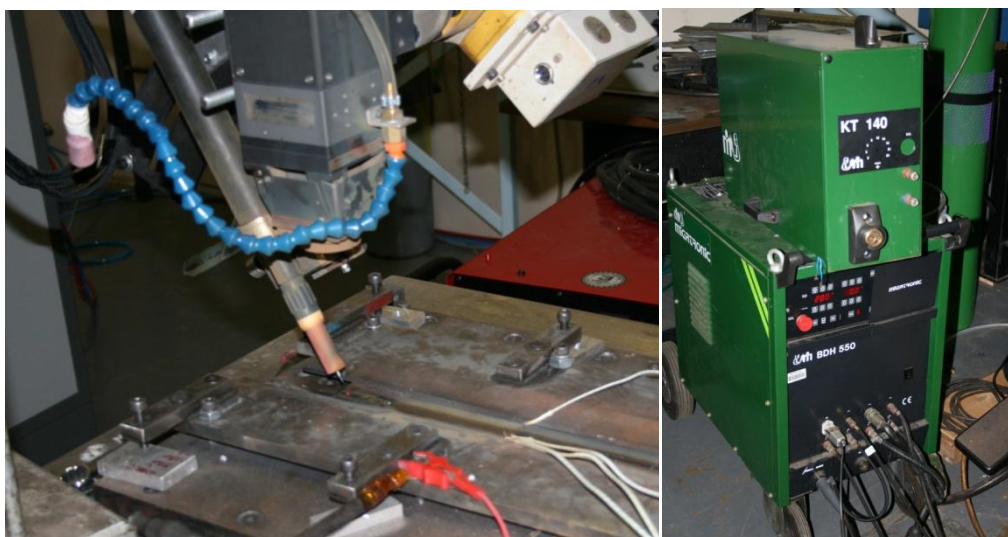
Experimental set-up and arc power source used in hybrid laser/TIG welding.
